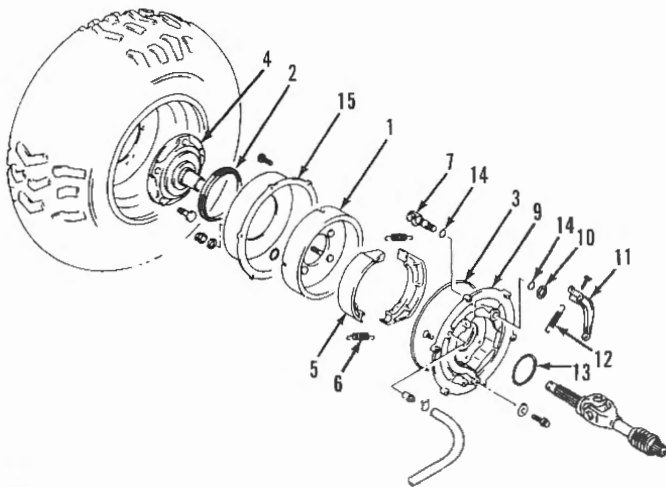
Exploded view of rear brake and hub assembly used on LT-F4WDX models.
